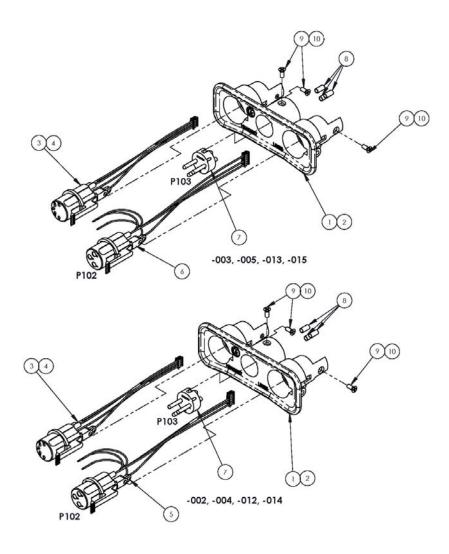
Connector Plate Assembly, BP351 - 90207486000
